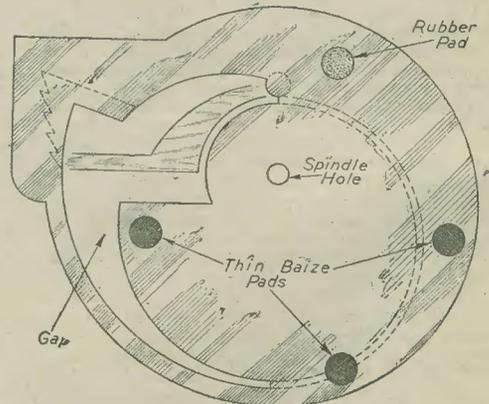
Back view, showing "gap" cut in celluloid backing and pad positions.
